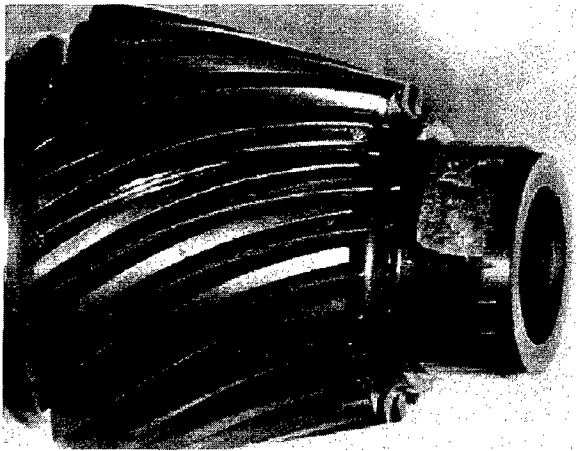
Main Module Input Pinion with Spalled Integral Raceway Bearing SB 2205.
